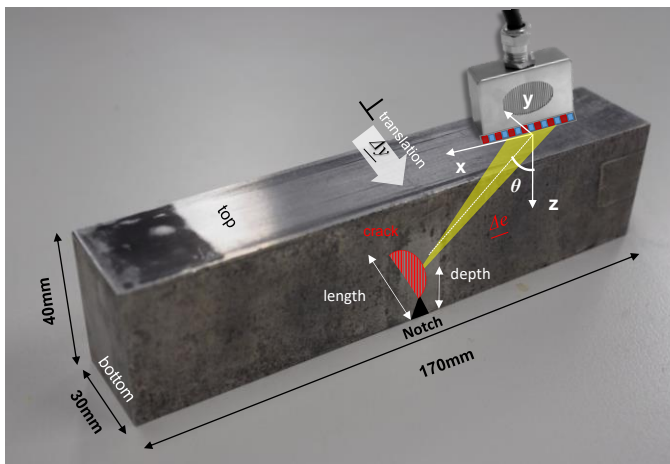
Schematic of the inspection (extracted from reference [6]). The phased array probe is placed in contact, steering the beam in the notch direction.
